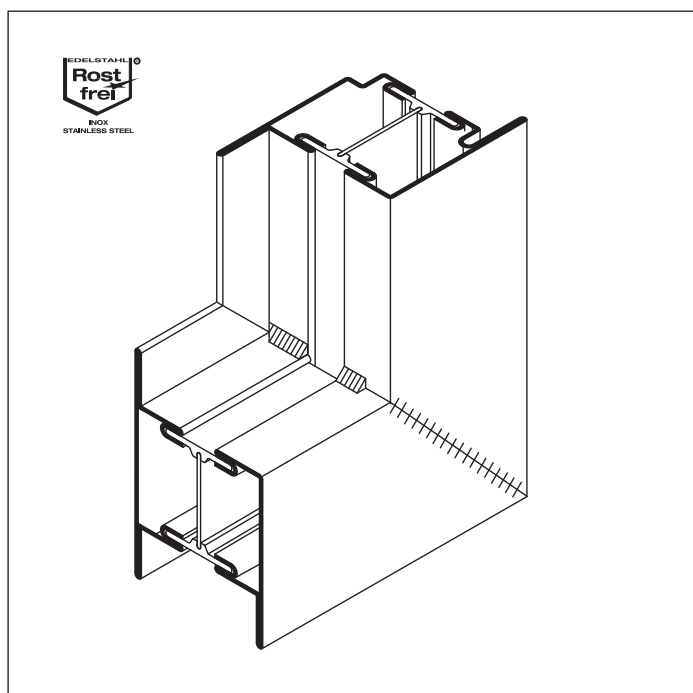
Janisol door leaf frame welded in the glazing rebate
